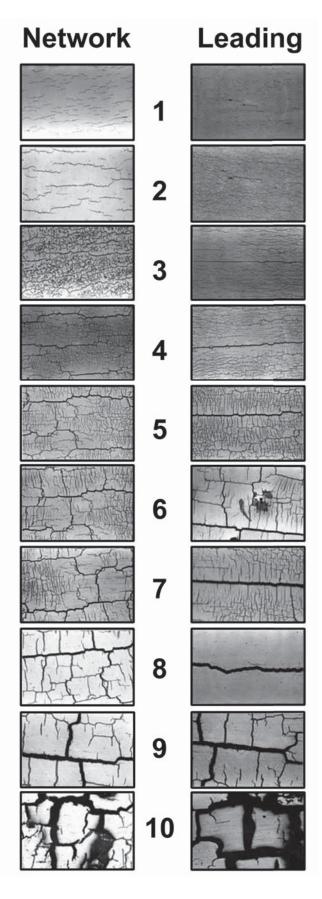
Photos of die surface crack patterns reproduced approximately 70% of actual size. The die steel heat check conditions is reflected as raised material on the surface of the casting.
